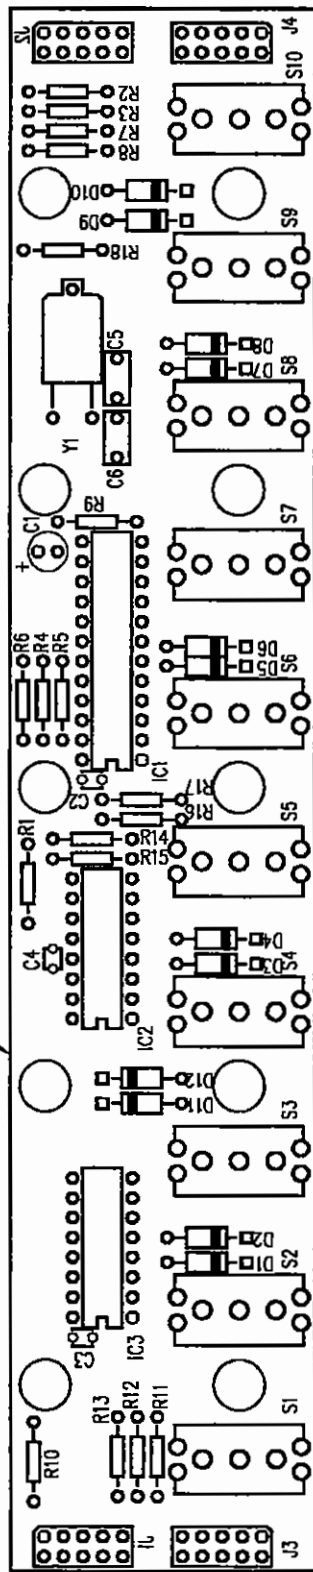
Assembly Drawing - ICS-92 Selector Switch PCB Rev. A
